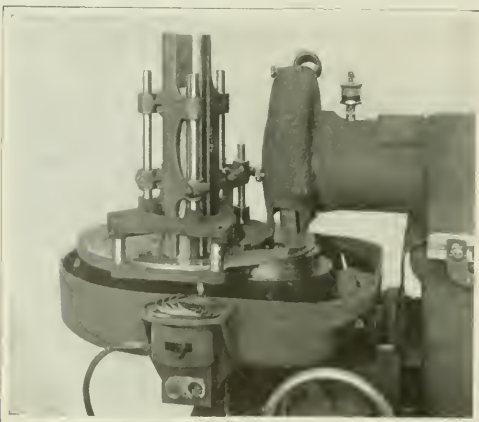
Close-up View of the Grinding Wheel, Magnetic Chuck, and Automatic Feeding Device
